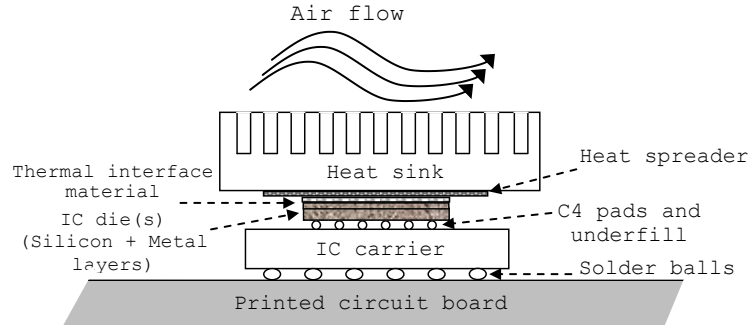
Side view of a typical IC package installed on a PCB showing the constituent layers [84].
